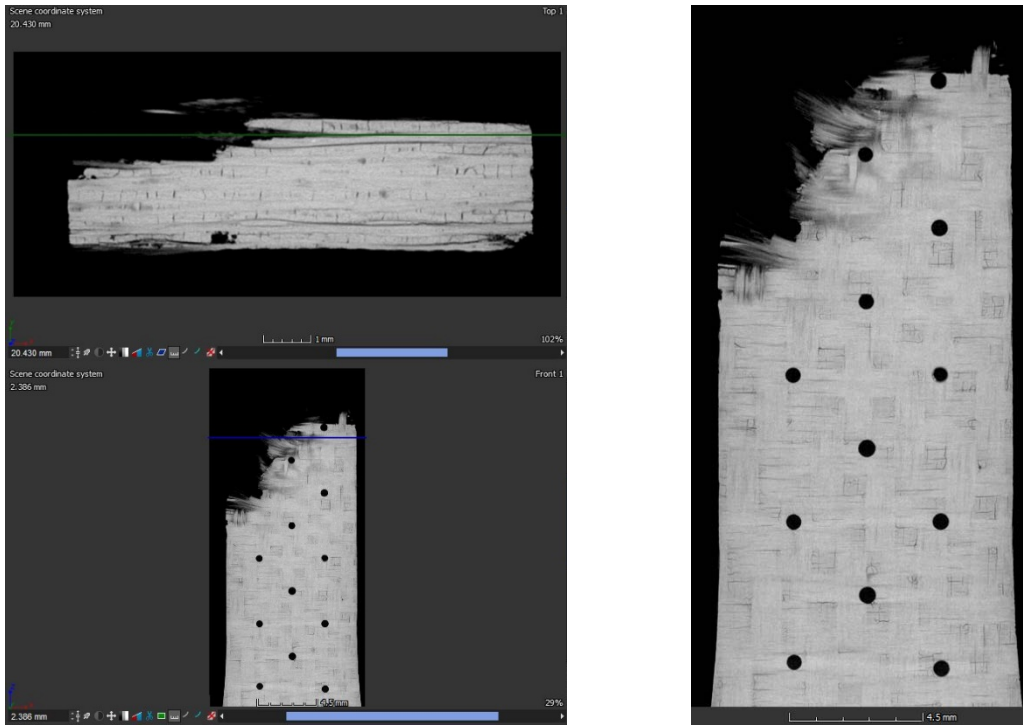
2D (x-z plane) vs 2D (x-y plane) location showing damage zone at Step 2 for specimen #3, tested in tension to failure at 1200°C in air
